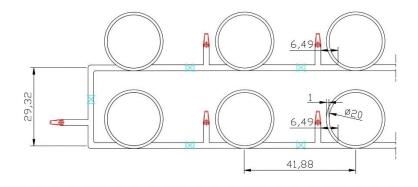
Flocculator prototype design, tank 1-6 from right below to right above (Front View)
